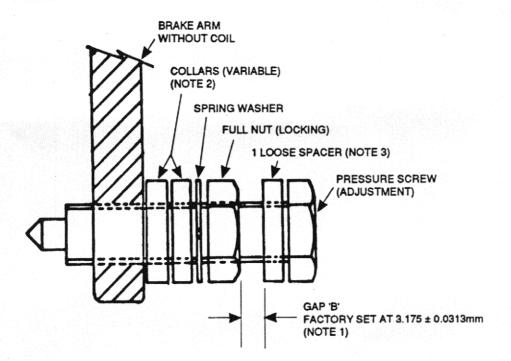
DETAILS OF CORRECT METHOD OF COMPRESSION SPRING ASSEMBLY
